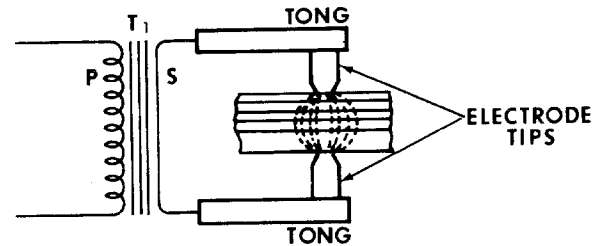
Resistance Spot Weld Heat Zones
